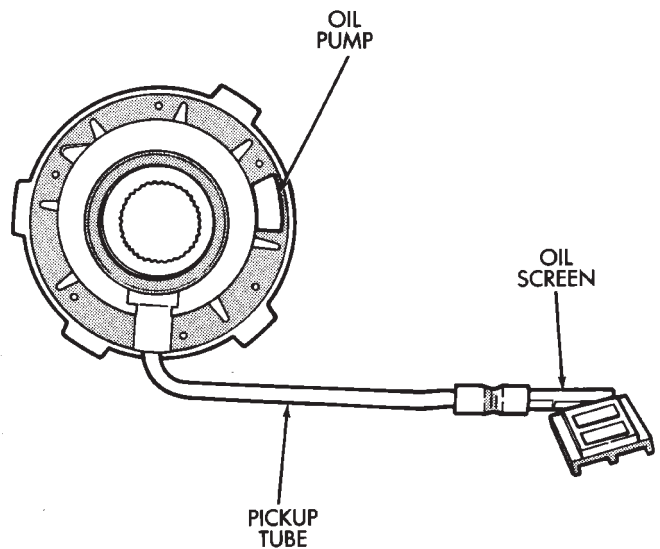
Removing Oil Pump, Pickup Tube And Screen
